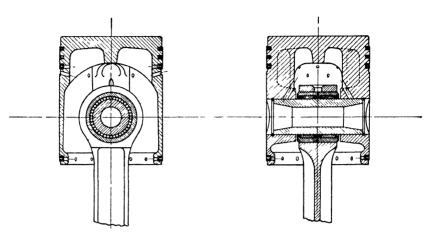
Gudgeon-pin with needle roller bearings for 2-cycle engine
